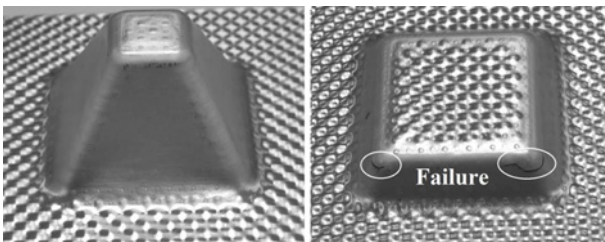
(b) Deformed shapes of the embossed specimen for the cone angles $\theta = 64^\circ$ (safe formed, left) and 66° (failure occurred, right) in the case of an outward movement tool path
